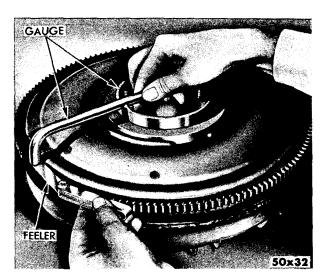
Positioning Ring Gear on Fluid Coupling (Tool C-896)
